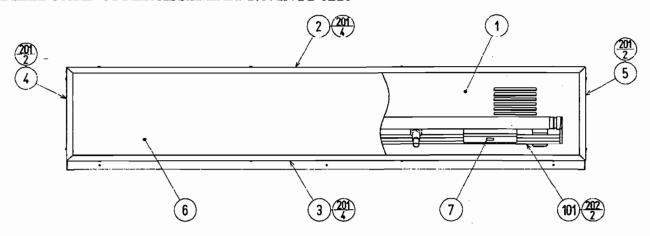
BILLBOARD UPPER ASSEMBLY
